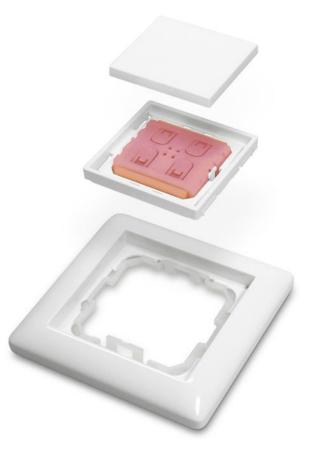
Explosion drawing of complete wall switch with highlighted PTM Module
